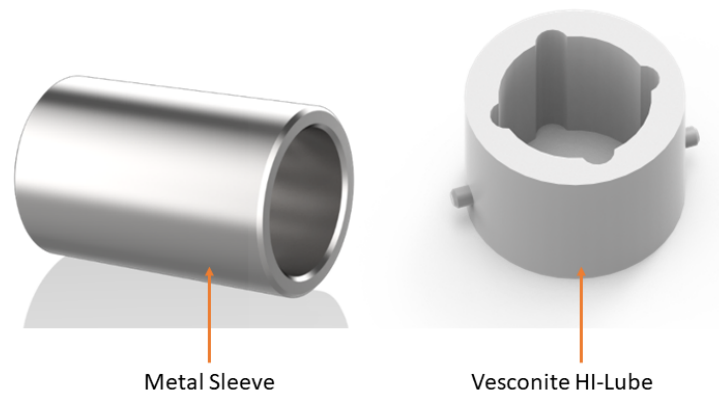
Metal Sleeve (Left), Polymer Bearing (Right).
